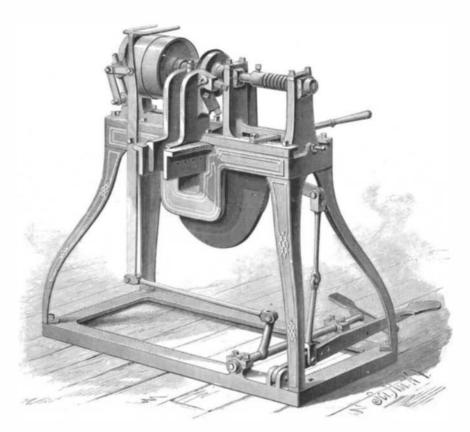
MACHINE FOR TURNING THE HEADS OF KEGS.
